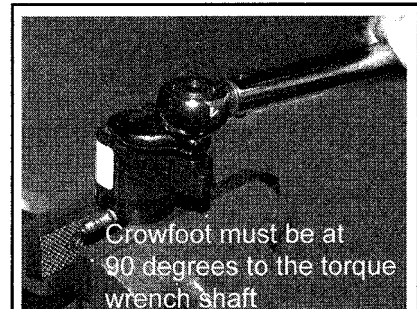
Then tighten using crowfoot adapter and torque wrench
